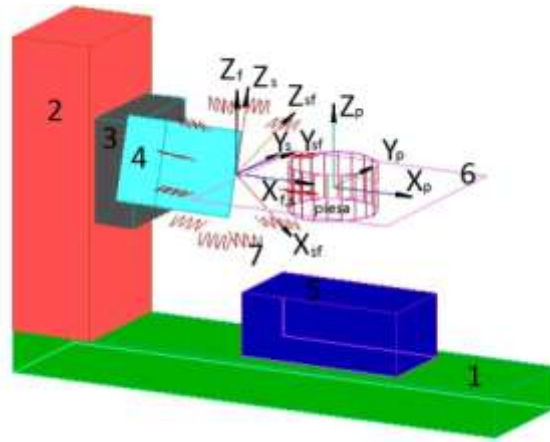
Cylindrical gear milling machine structure with processing coordinate: 1-frame; 2-pillar; 3-vertical slide; 4- hub slide; 5- weight slide port; 6-generation plane with $z = 0$; 7-cutting edges; X_f, Y_f, Z_f - fixed coordinate system; X_s, Y_s, Z_s - coordinate system of the tool X_p, Y_p, Z_p - coordinate system of the part; X_{sf}, Y_{sf}, Z_{sf} - coordinate system of the cutting tool.
